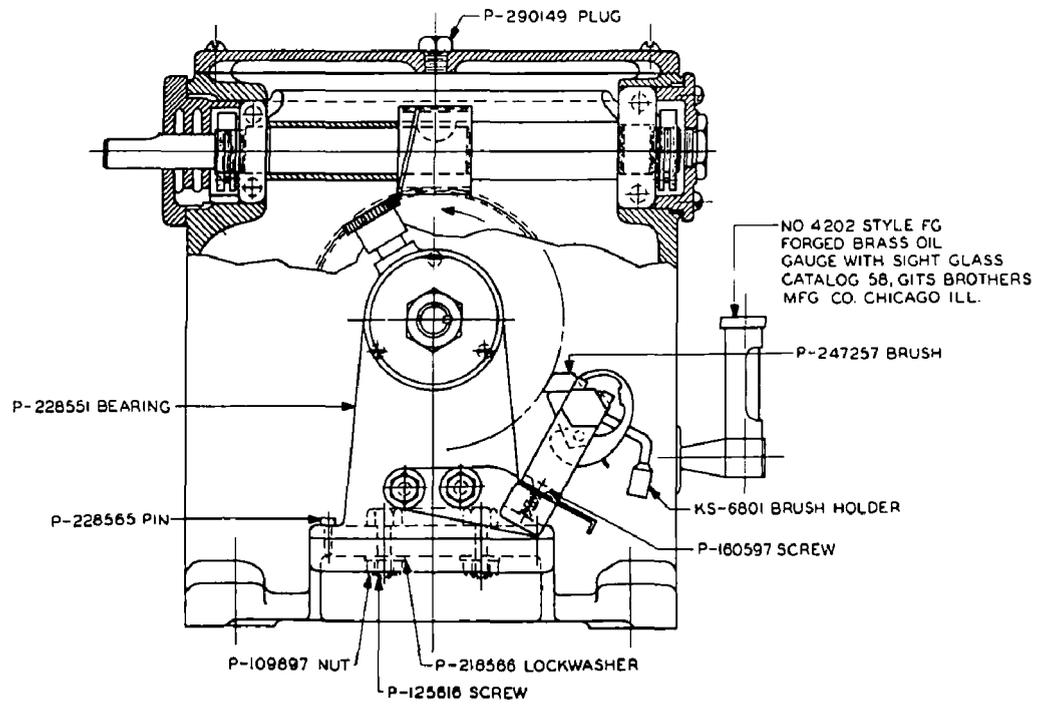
1C, 1D, and 1E Interrupter Mountings—Side View (For Top View See Fig. 4)
